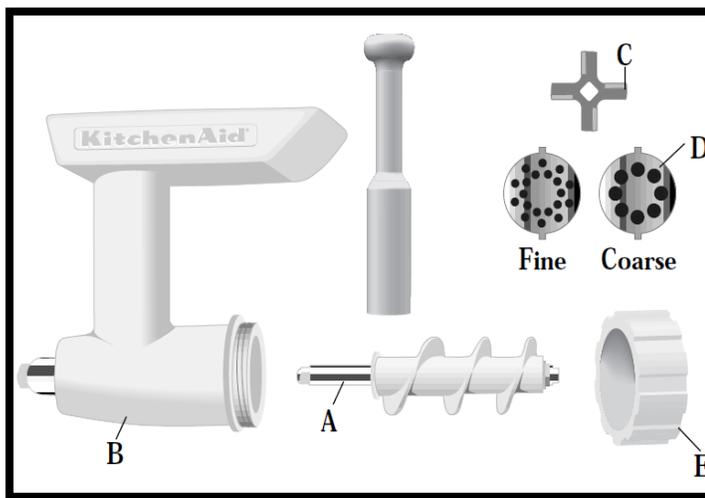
Assembly of KitchenAid™ Stand Mixer Food Grinder Attachment.
